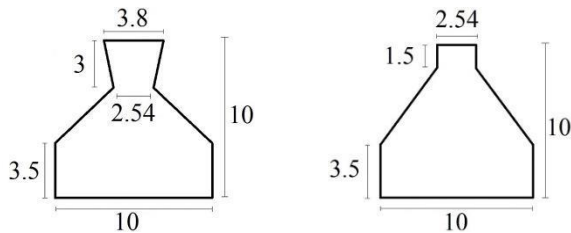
Nozzles dimension (lengths by millimeter): converging nozzle at the right hand side and converging-diverging nozzle at the left hand side
